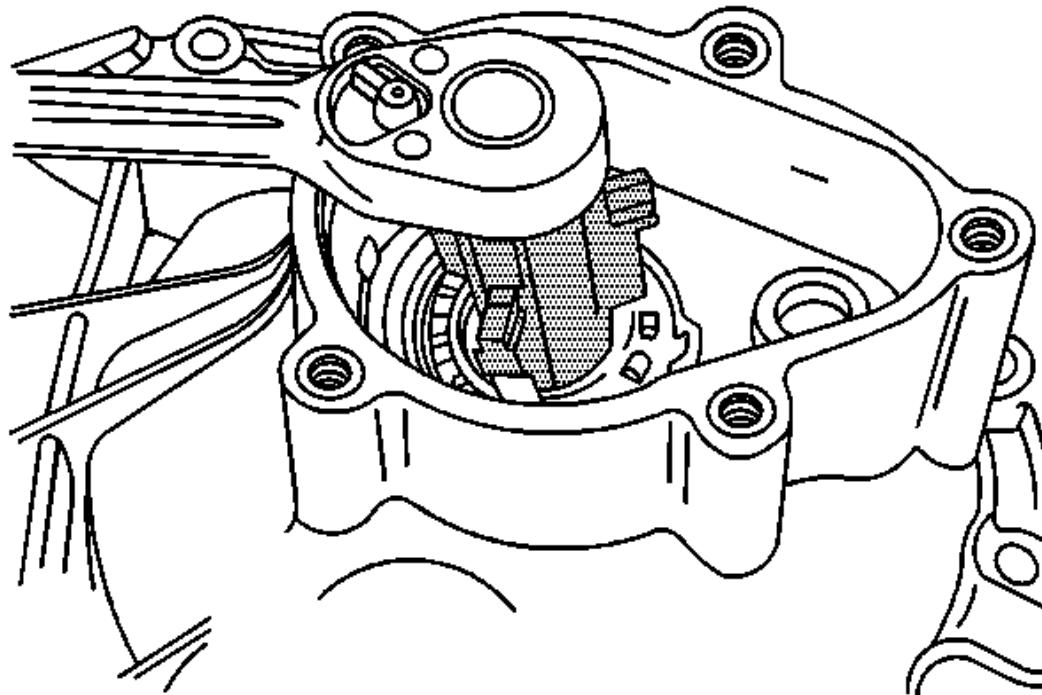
Differential Bearing Adjuster Nuts & Bearing Cups
